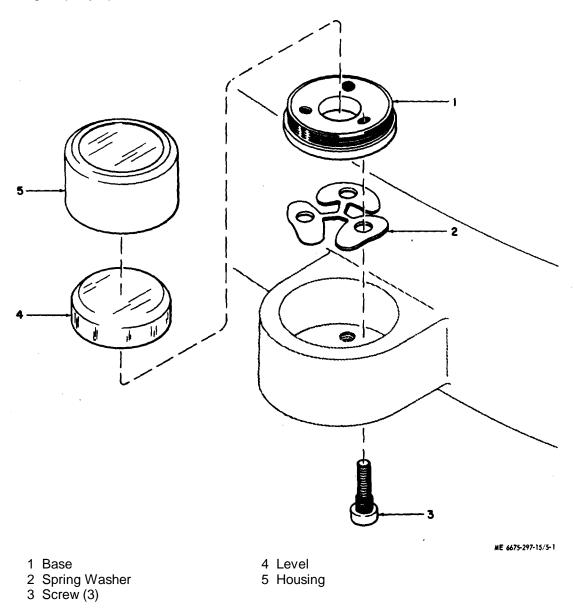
Circular level, removal, disassembly, reassembly, and installation.
